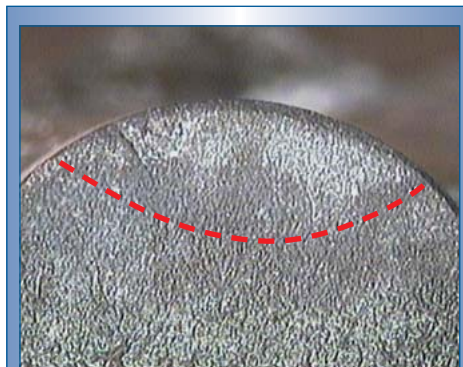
The above photo shows typical impact damage to a conventional thermally stable diamond cutter.
